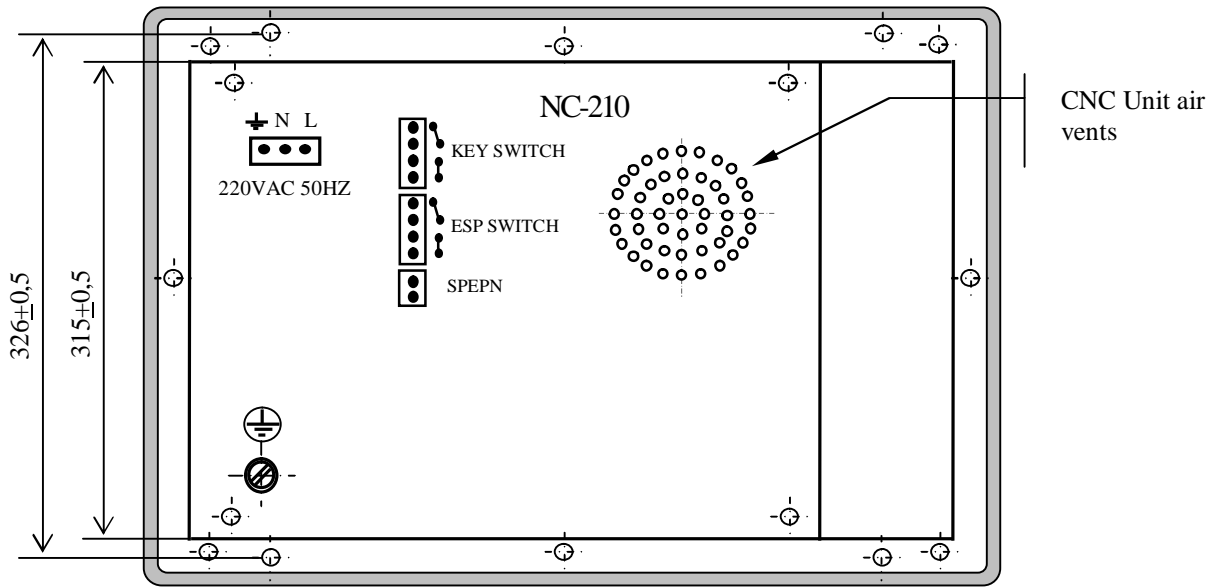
View of the rear panel of the NC-210 CNC Unit
